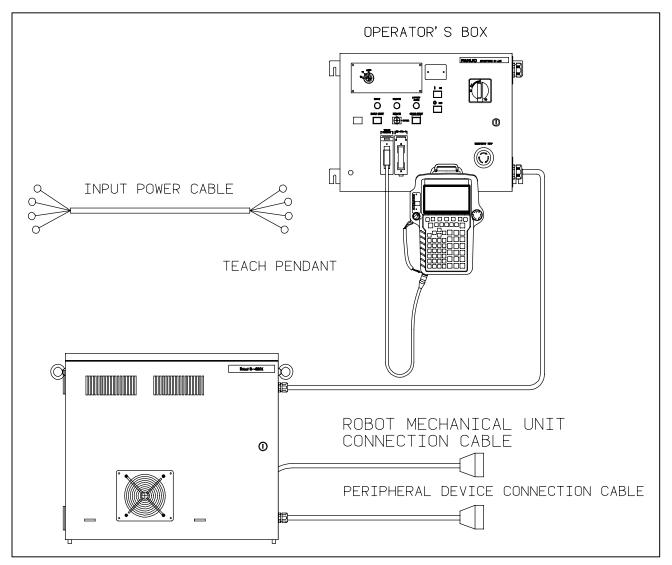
(a) Connecting Cables at Installation (i cabinet)
